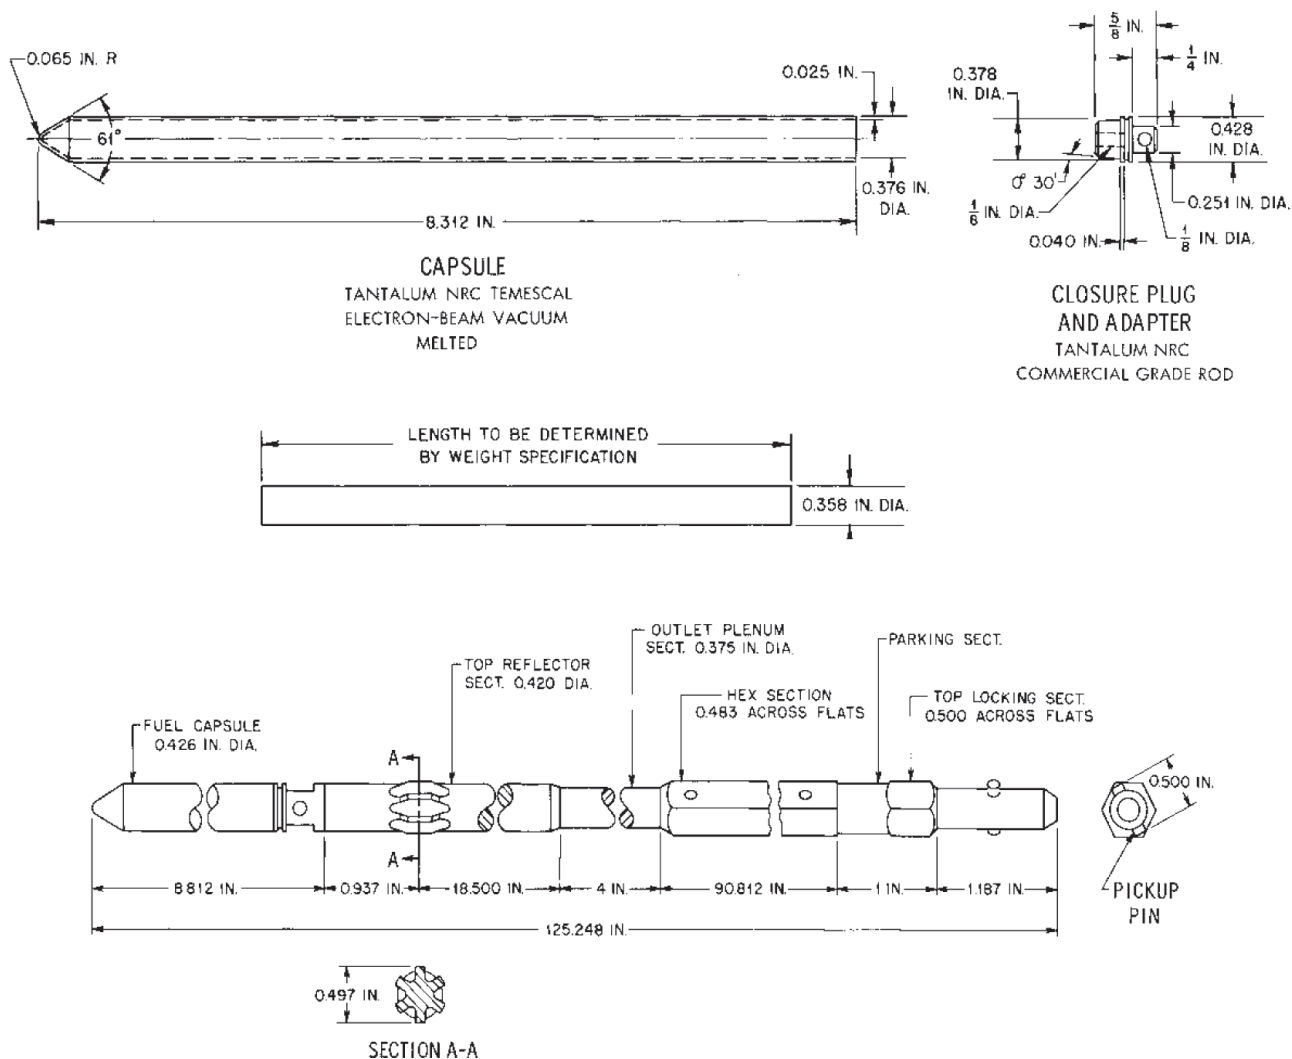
LAMPRE fuel capsule and fuel subassembly [4.3].
